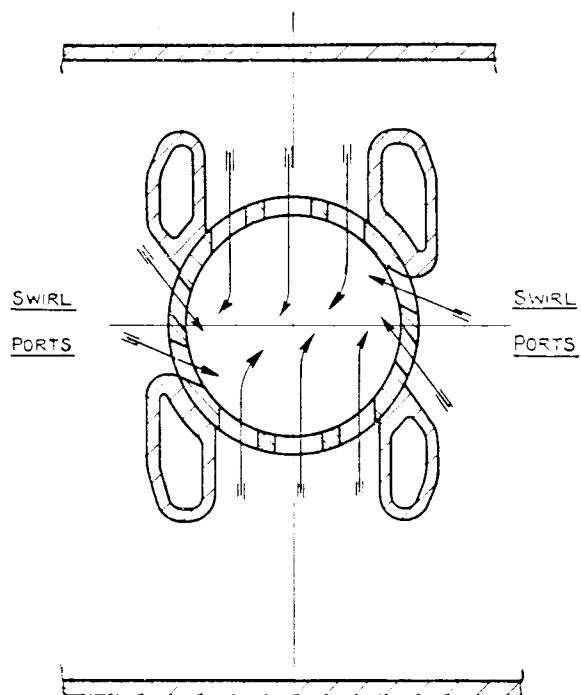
Inlet Ports of Petter Superscavenge Engine. In this section through cylinder and liner arrows indicate the believed air flow causing rotation of charge.
